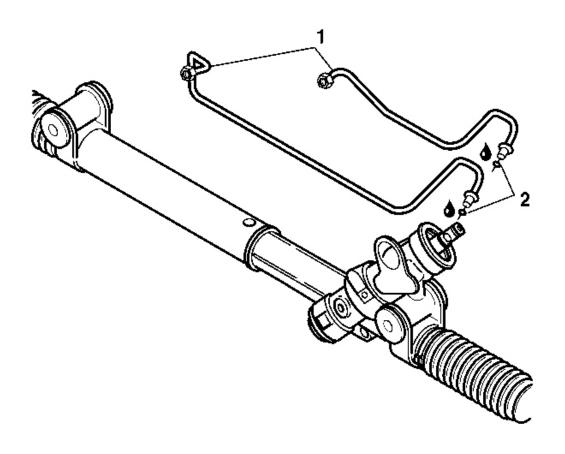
Removing Both Cylinder Line Assemblies From Gear Assembly Courtesy of GENERAL MOTORS CORP.
